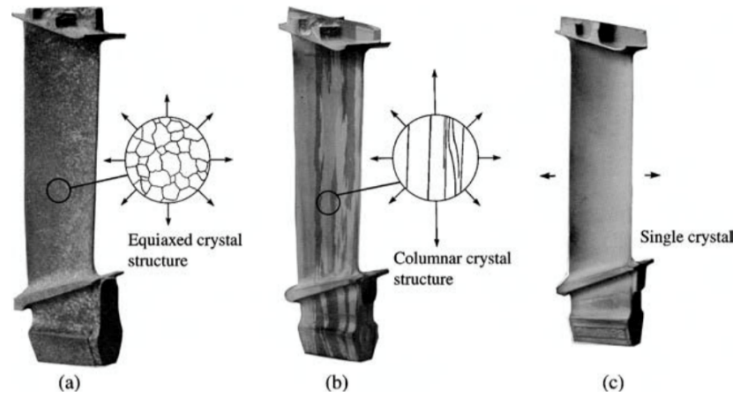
Turbine blade casting in equiaxed (a), directionally solidified (b), and single crystal (c) forms.⁵
